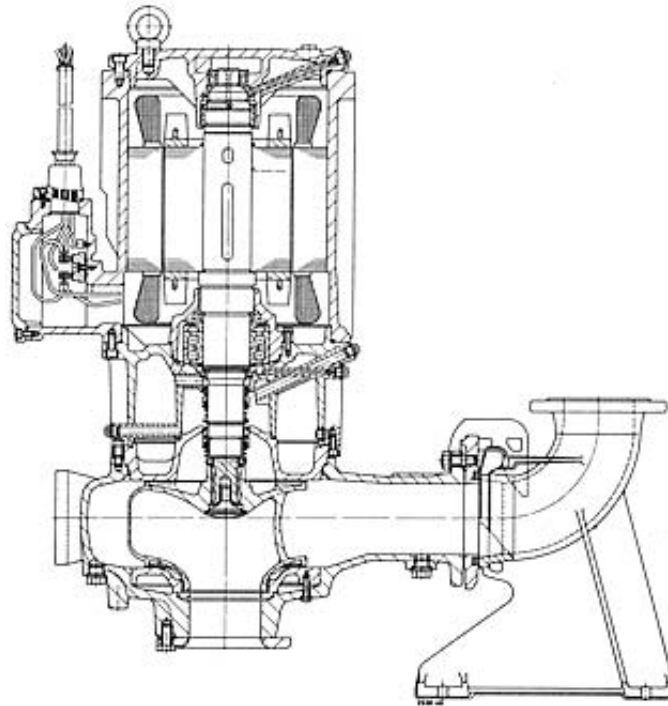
Submersible motor pump with single vane impeller used as a sewage pump
